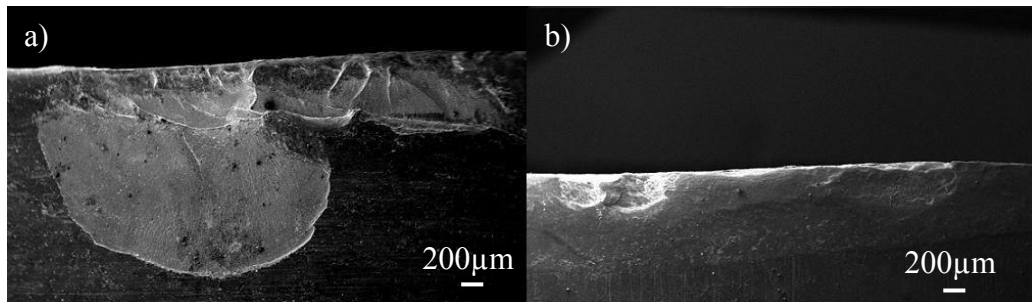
; Damage in the cutting edge of the same punch after 5000 strokes for a) the highest hardness tools and b) the lowest hardness tools
